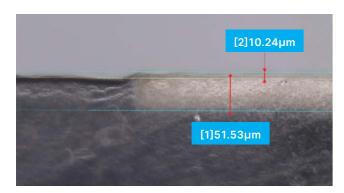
Cross-section of the tube wall with laser-engraved 2D code, forming a durable 3D structure; image captured via optical microscopy (Keyence VHX-7000)
